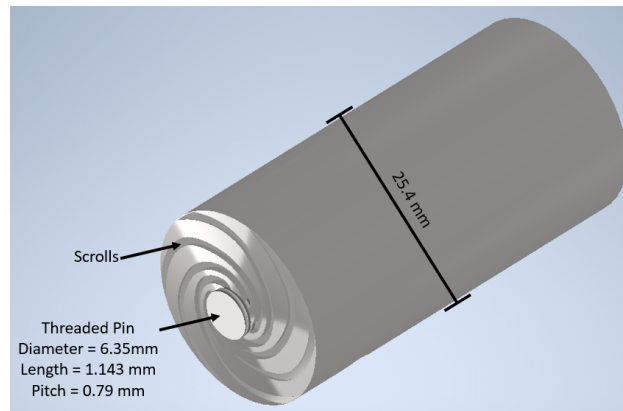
FSW tool consisting of threaded pin and scrolled parabolic shoulder.
